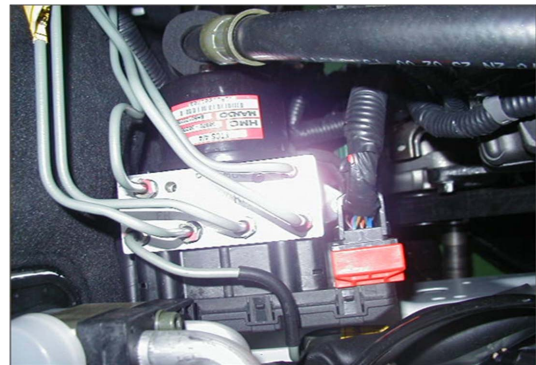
Leaking example of brake fluid between brake pipe and hydraulic modulator.
